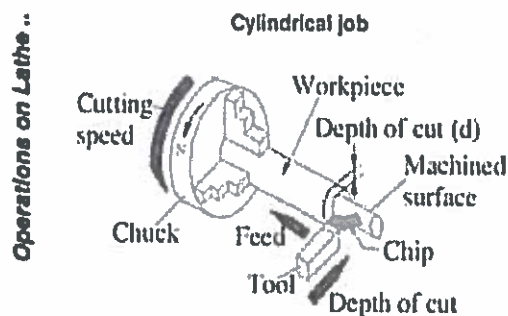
Turning of cylindrical work piece Single Point Cutting Tool Nomenclature
